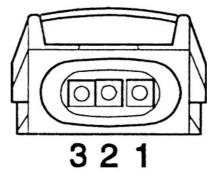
Testing the coil driver circuit between pins 2 and 3 $\,$
